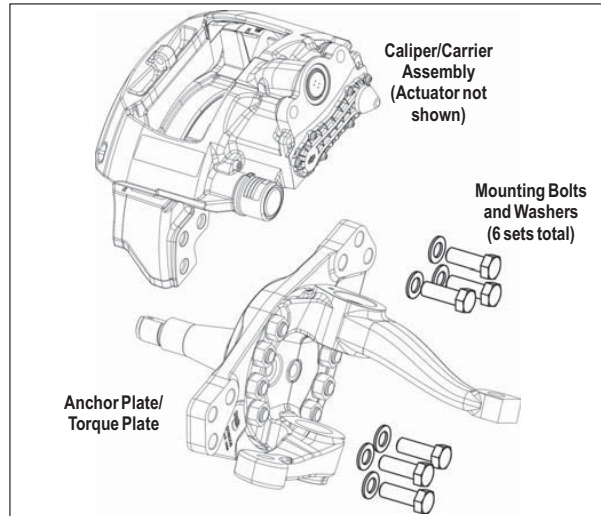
AXIAL MOUNT CALIPER/CARRIER
